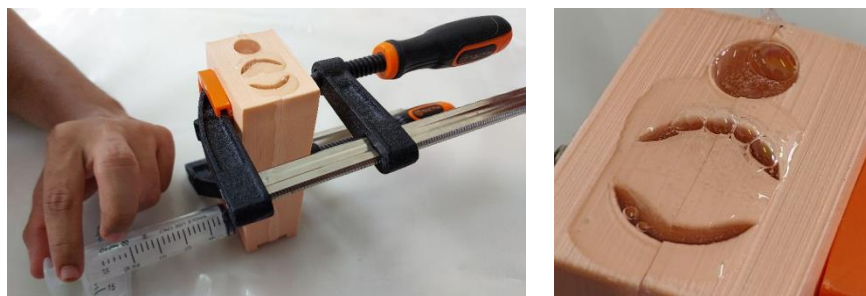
(Left) silicone is poured into the mould using a syringe pumped through a hole; and (Right) the excessive silicone is exuded out through the mould to ensure no bubbles are formed inside
